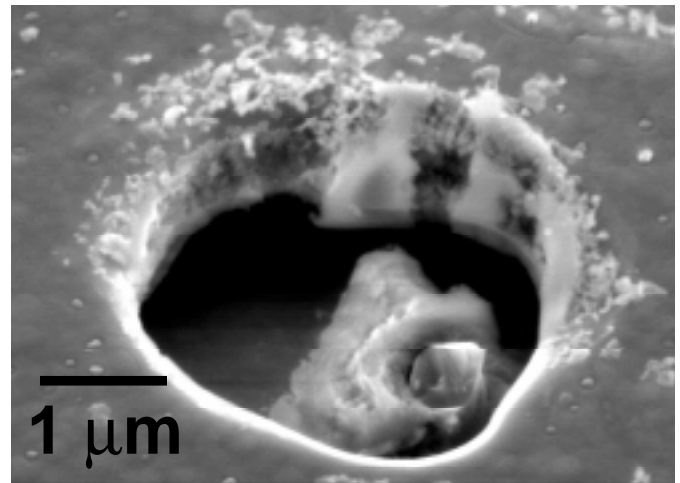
Severe pin hole damage in drive gear tested to failure (SEM).
